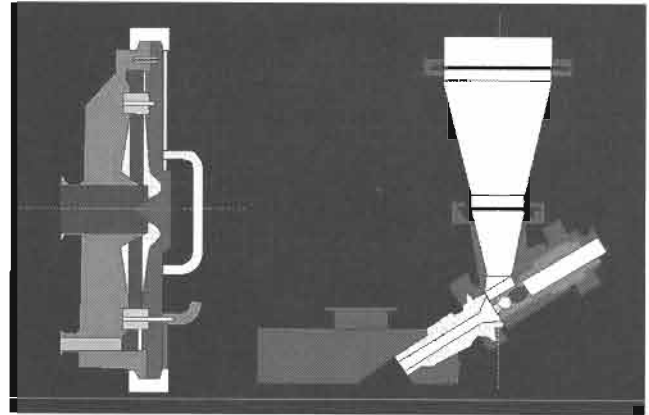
Sectional Drawing of a Spiral Jet Micronizer
